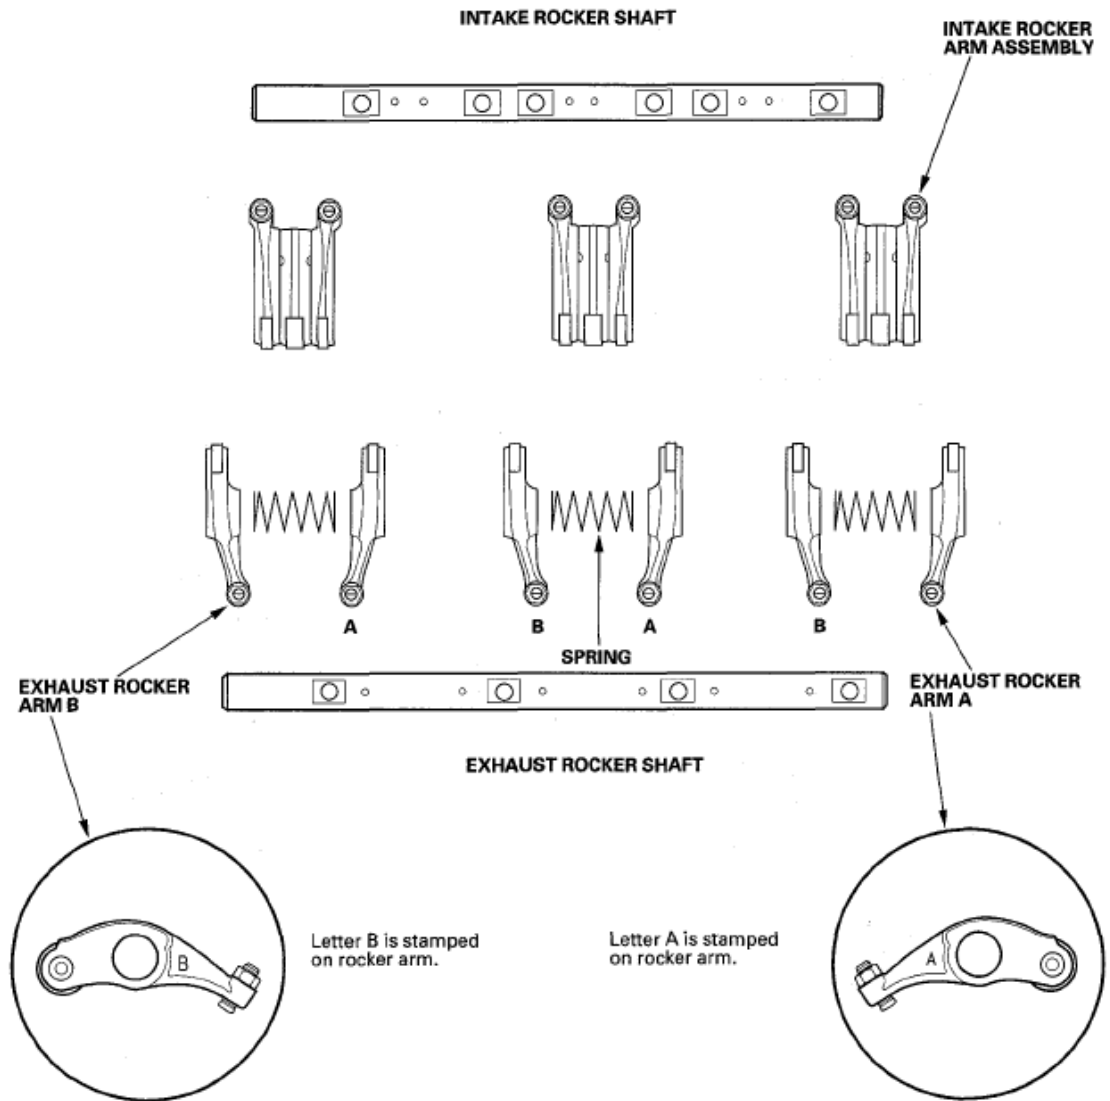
Assembling/Disassembling View Of Rocker Arm And Shaft
